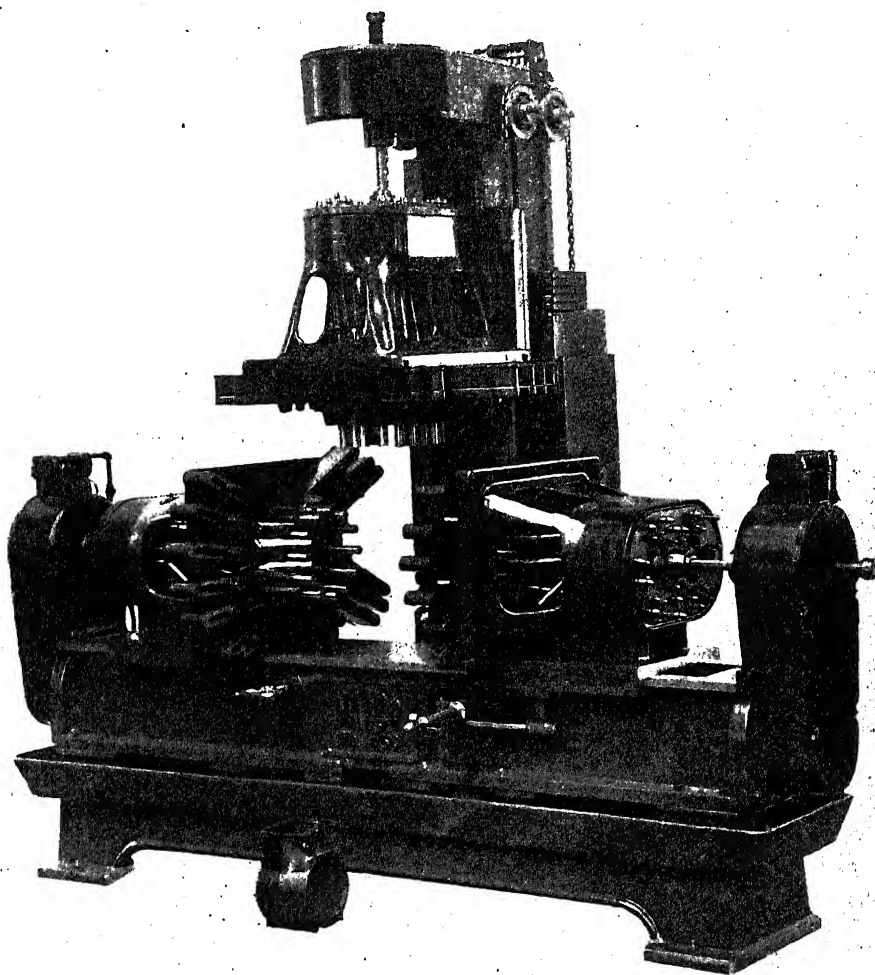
Three-way Horizontal Multi-spindle Machine
